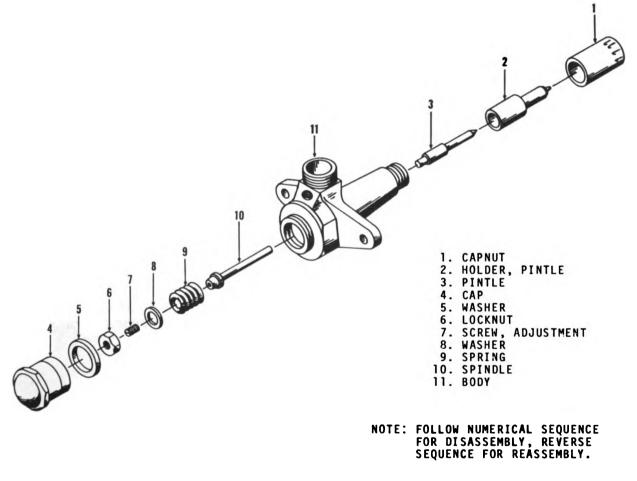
Fuel injection assembly, disassembly and reassembly (Shoet 1 of 2).
